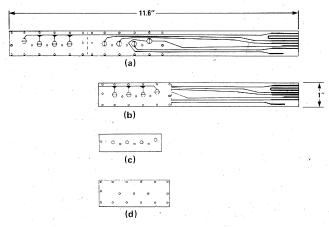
Flex-Circuit Assembly. a) Layout of the flex-circuit. b) Layout of the flex-circuit after it has been folded to form the contacts of three SPST momentary pushbutton switches and one SPST slide switch. c) Thin plastic insulator which must be inserted between the folded portions of the flex-circuit. d) Plastic cover which fits over the flex-circuit assembly to hold it in place in the top of the case.
